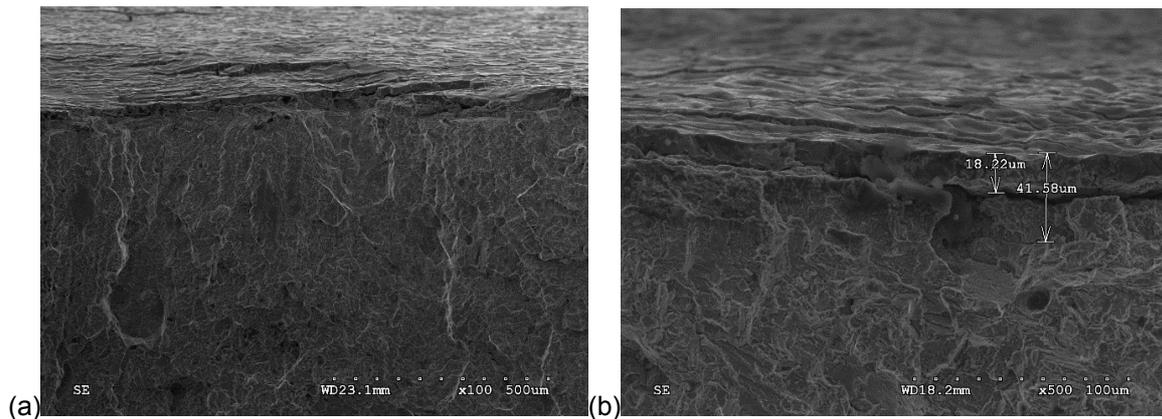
Image of the fatigue fracture with the visible cracks in aluminide layer, obtained with the use of SEM
